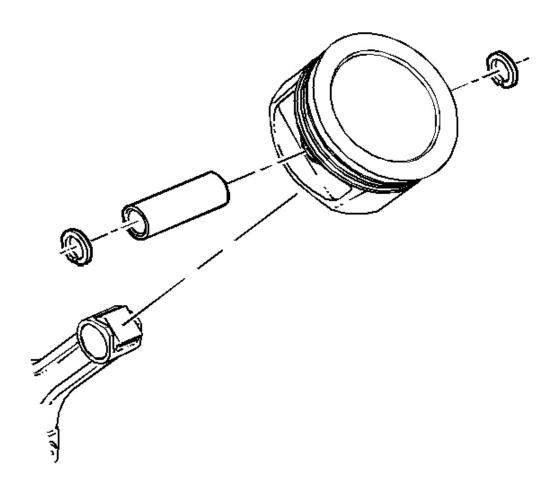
View Of Piston Pin, Piston, Clips & Connecting Rod Courtesy of GENERAL MOTORS CORP.
